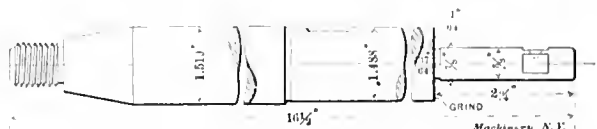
A Grinding Machine Spindle; the $\frac{5}{16}$ -inch Diameter is machined after Case-hardening
